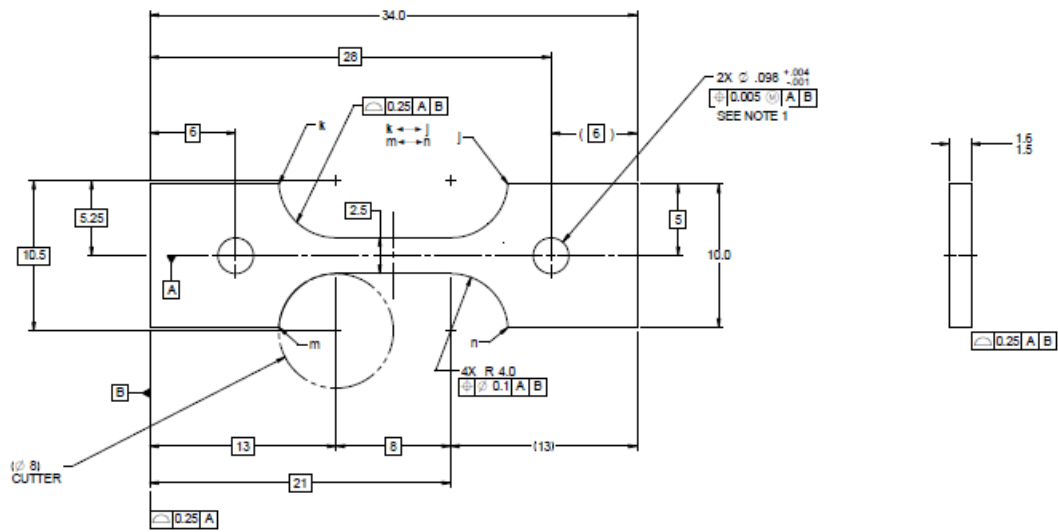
Conventionally machined geometry of coupons produced using Zr-2.12Nb substrate
